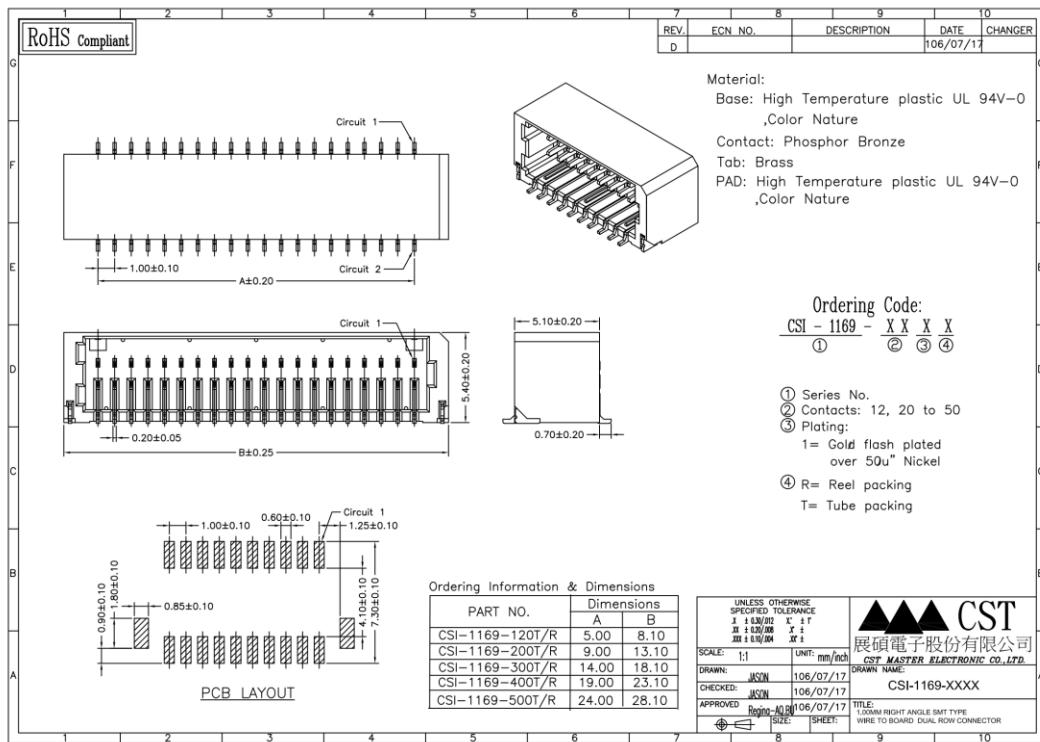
Wire to Board SMD 2*10P 90D Connector Drawing (CN1/CN2)
